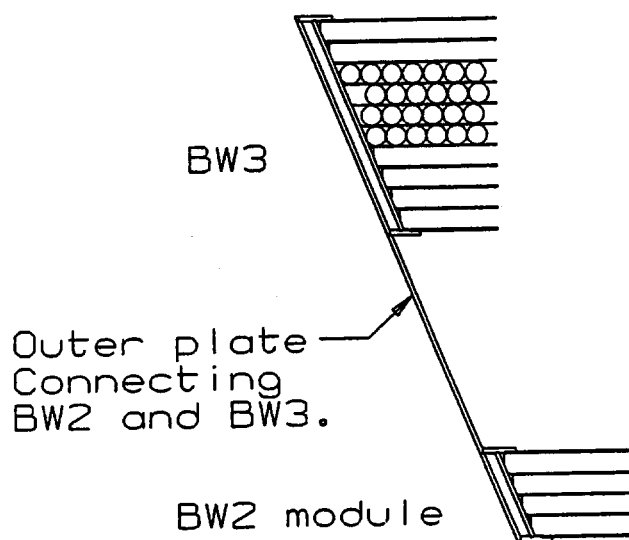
Outer plate which connects BW2 and BW3 to form an assembly.
